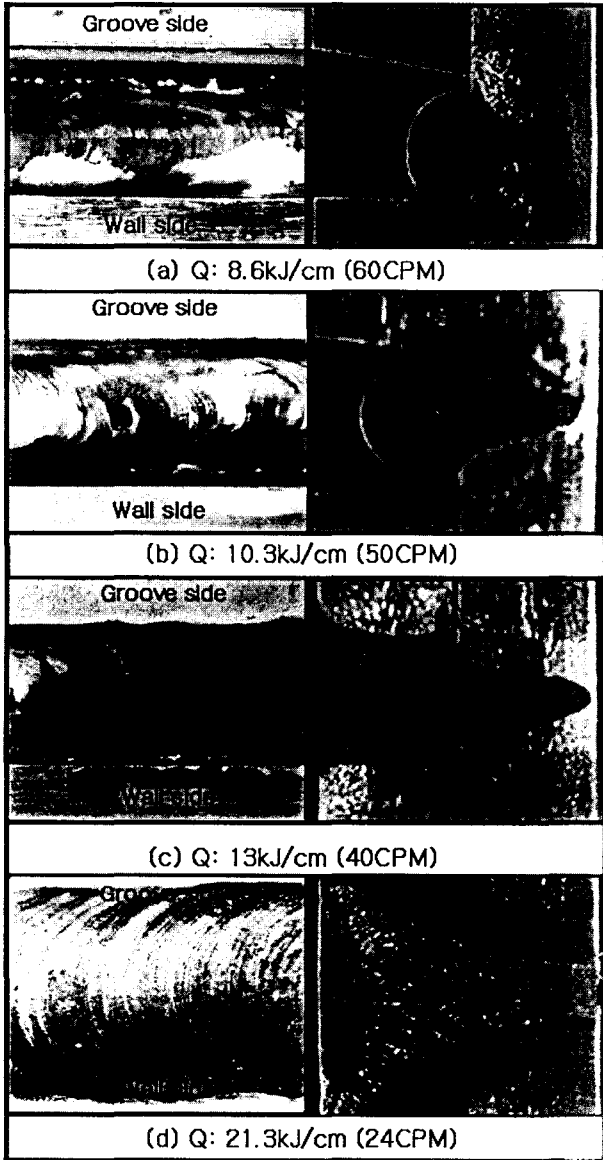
Bead appearance and cross-section by groove welding (bevel angle 10° 300A)
